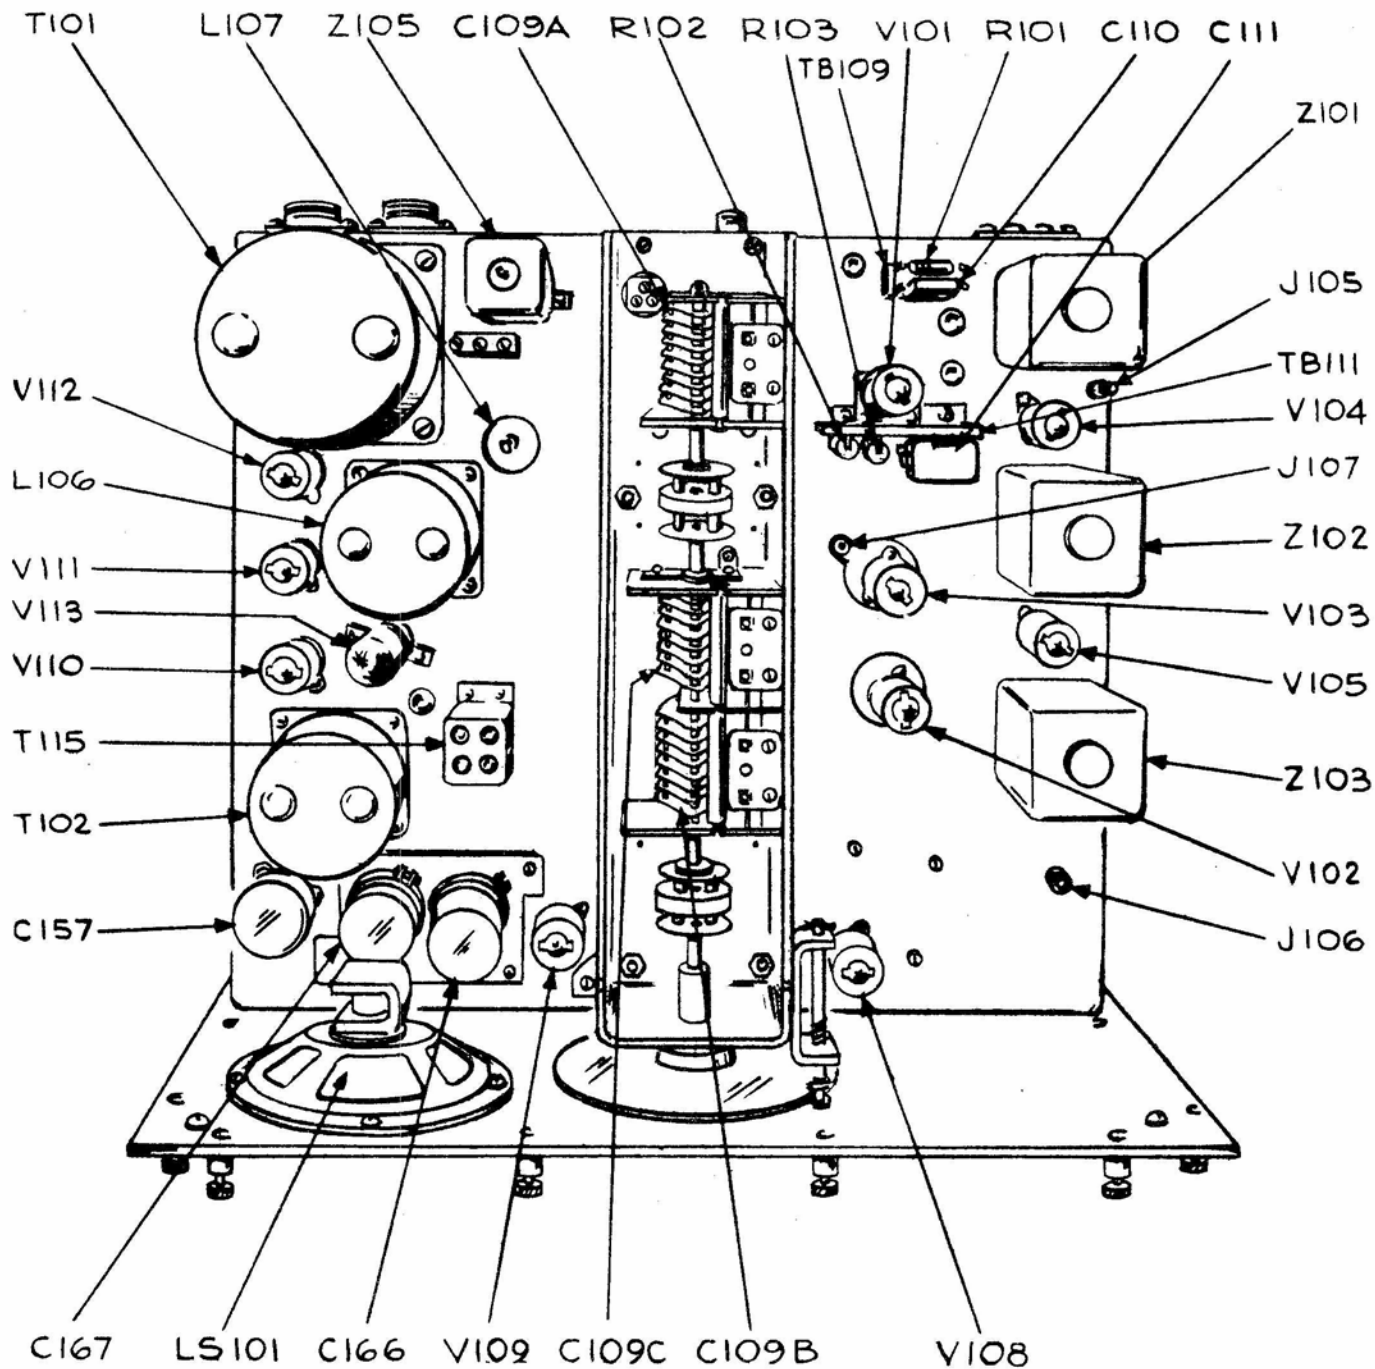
Receiver Chassis Top View, Parts Location Diagram
